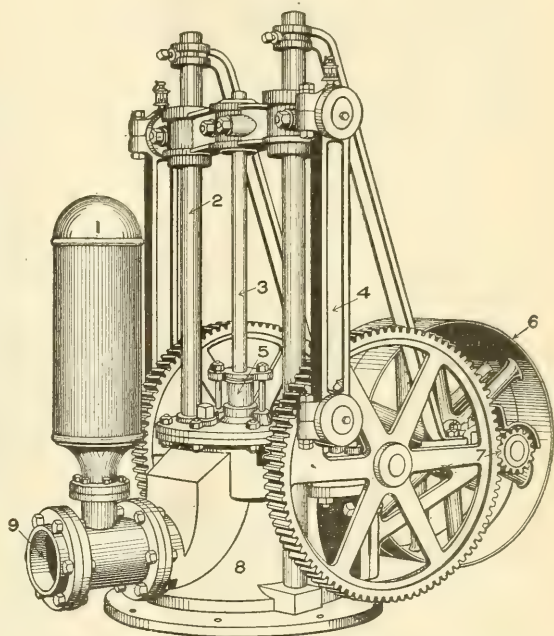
Typical power working-head for deep-well pumps having a 24-inch stroke. 1, Air chamber; 2, crosshead guides; 3, piston rod; 4, connecting rod; 5, packing gland; 6, tight and loose pulleys; 7, gear wheel; 8, base; 9, discharge opening.
